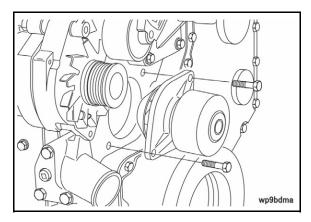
REMOVE THE CAPSCREWS AND WATER PUMP
